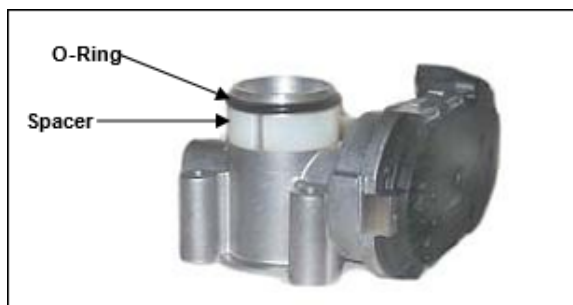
O-Ring and Spacer Within Mixer Adapter Assembly
